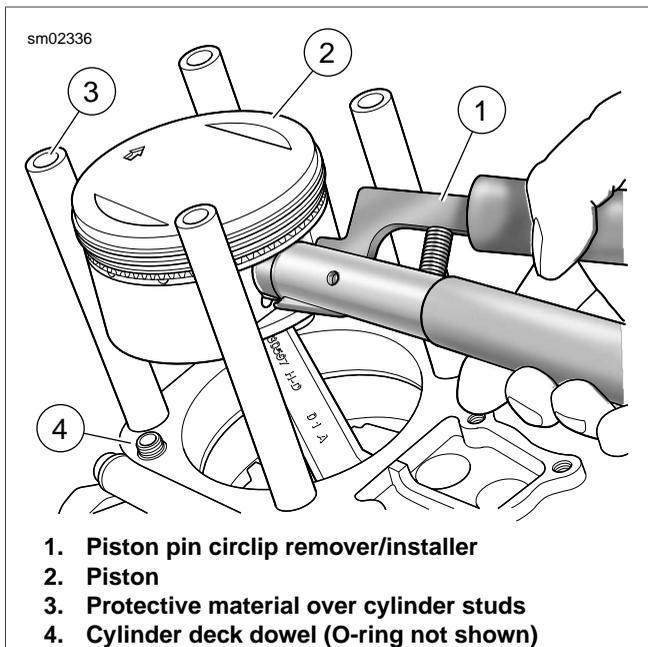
Piston Pin Circlip Removal (Part No. HD-42317)
